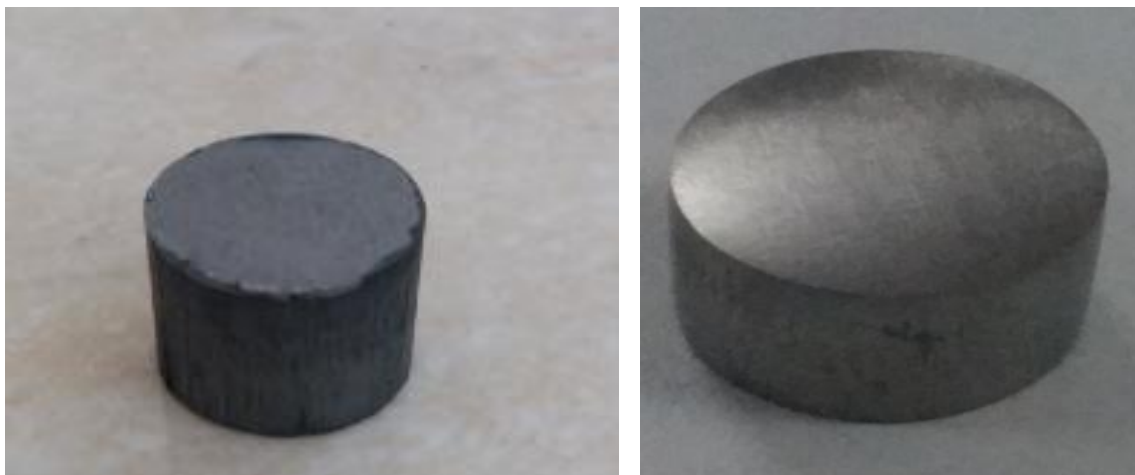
Hot pressed Ti-Nb specimen before and after grinding.
